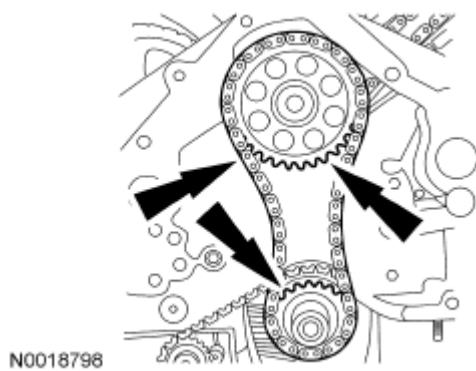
Identifying Jackshaft, Crankshaft Sprockets And Chain
